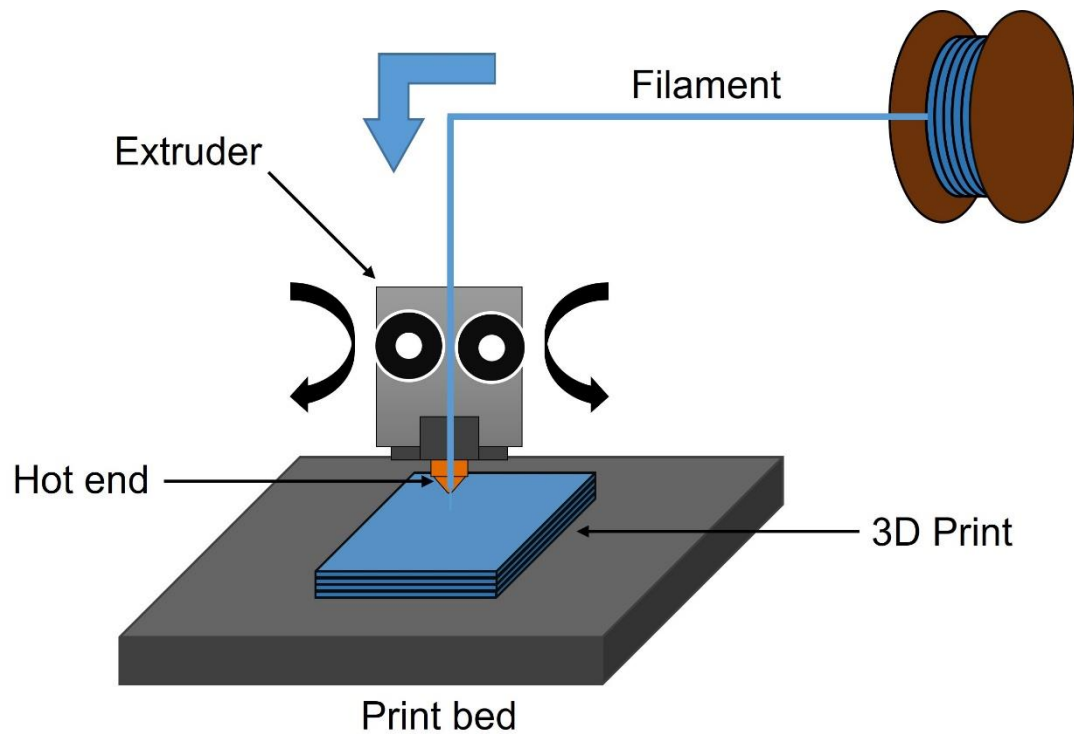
Scheme of an extrusion 3d printer, that pushes a plastic filament through a hot end and nozzle to 3D print an object layer by layer.
